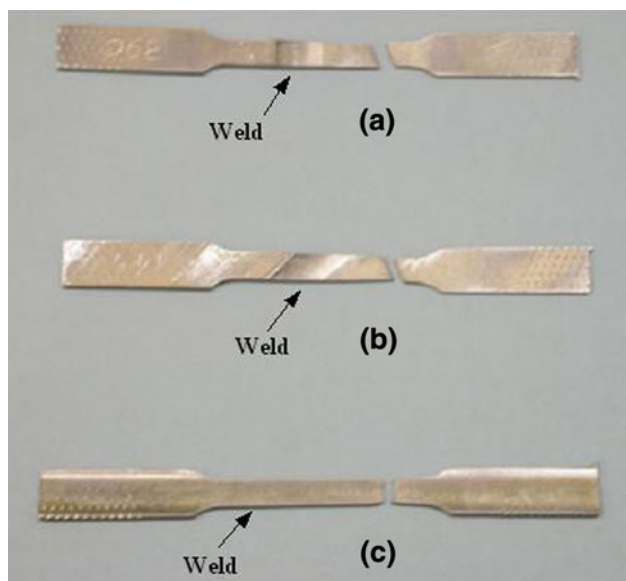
Photographs showing failure location in TWB tensile specimens. (a) Weld at 90°; (b) weld at 45°; and (c) weld at 0° to loading direction
